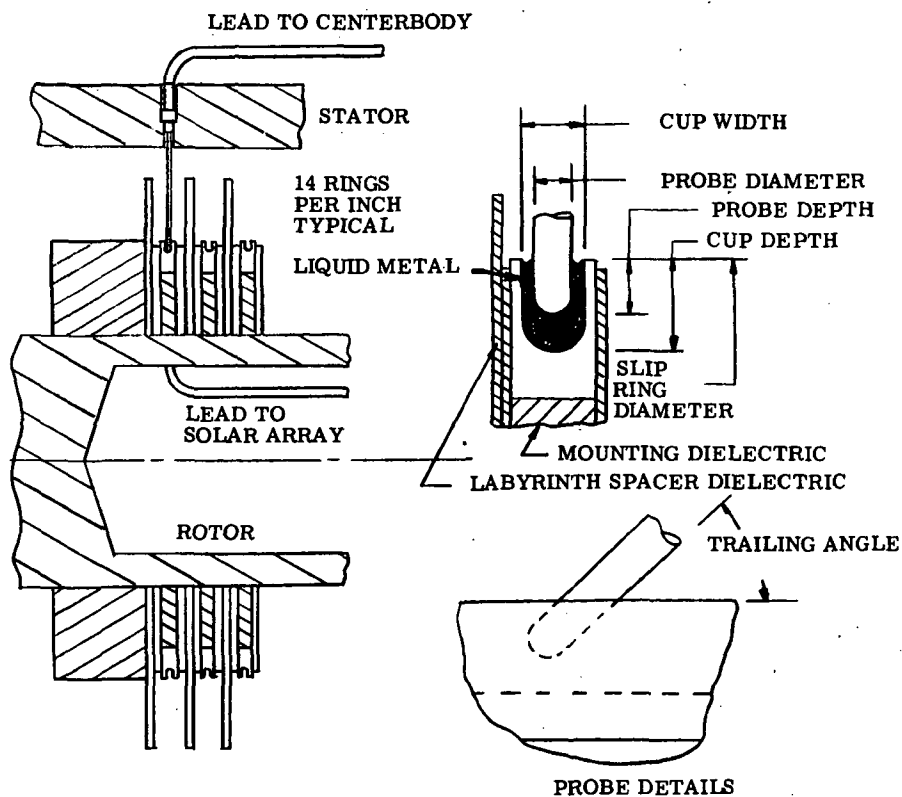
TYPICAL LMSR ASSEMBLY
